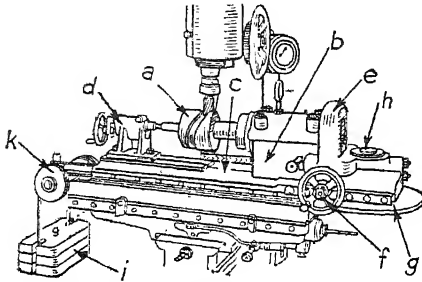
Special attachment for producing cylindrical cams from radial templates: *a*, cylindrical workpiece on mandrel; *b*, headstock of fixture; *c*, base plate of fixture; *d*, tailstock of fixture; *e*, worm-gear built in headstock; *f*, hand-wheel operating worm which drives worm-wheel on headstock and worm-wheel for the spindle of template; worm gear can also be driven from telescopic feed-shaft of the milling machine; *g*, radial template; *h*, vertical spindle of template, driven by worm-wheel; *i*, weights suspended on ropes; *k*, guiding rollers for rope.
